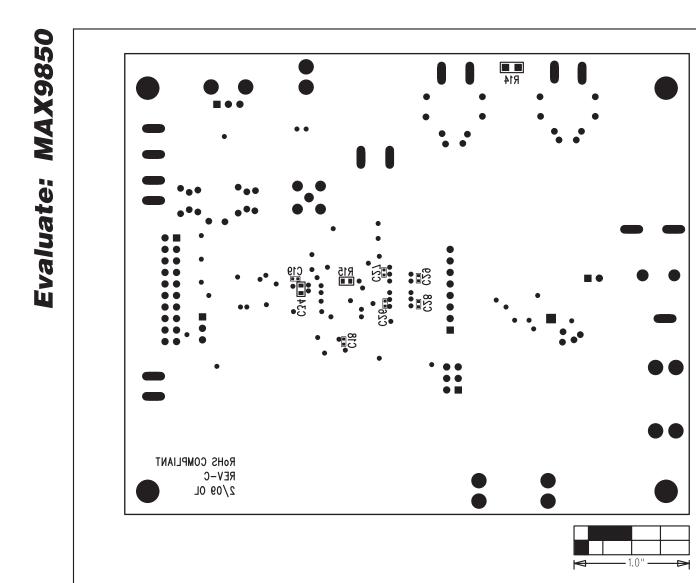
MAX9850 EV Kit Component Placement Guide—Solder Side
